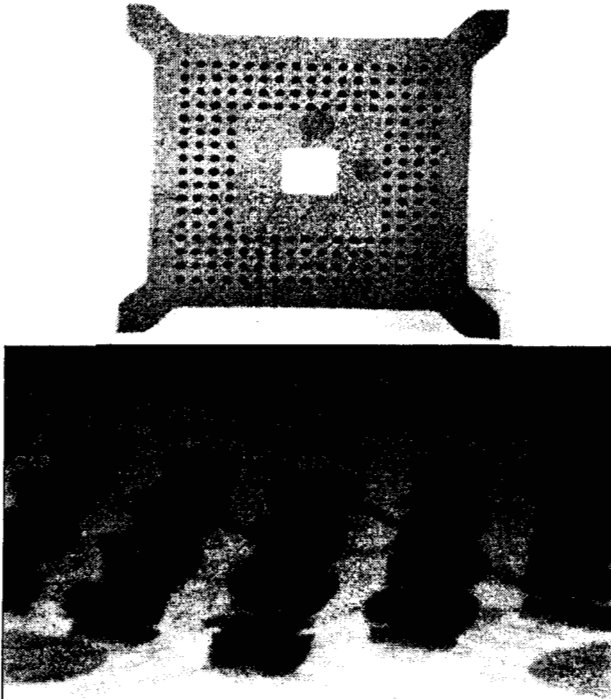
Exaggerated X-rays showing failure from either package or board sites
